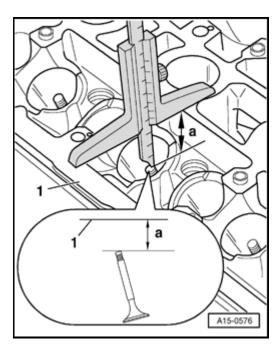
Measuring Distance Between Valve Stem End (Upper Edge) And Top Surface Of Cylinder Head Using Depth Gauge
